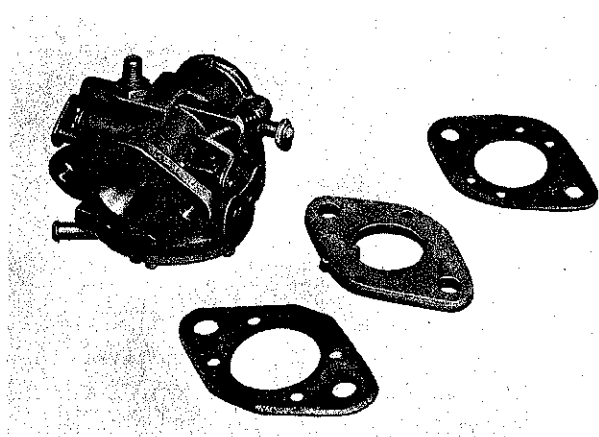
When assembling the carburetor, carburetor adapter, and gaskets, make sure that the pulsation passage holes are open. The wrong position of either gasket or the adapter can block the passage and prevent operation of the engine.
